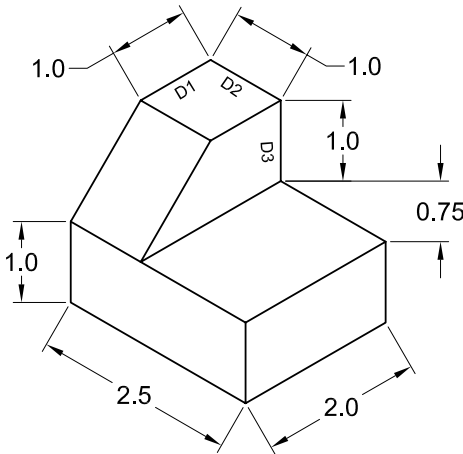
The dimensioned isometric drawing before using the Oblique tool
